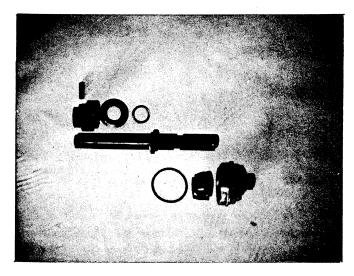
Agitator Shaft, Seal and Gear Assembly
